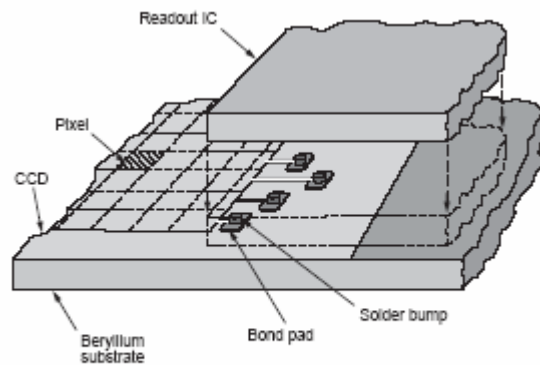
Exploded isometric view of the interconnect region between CPCCD and readout chip.
